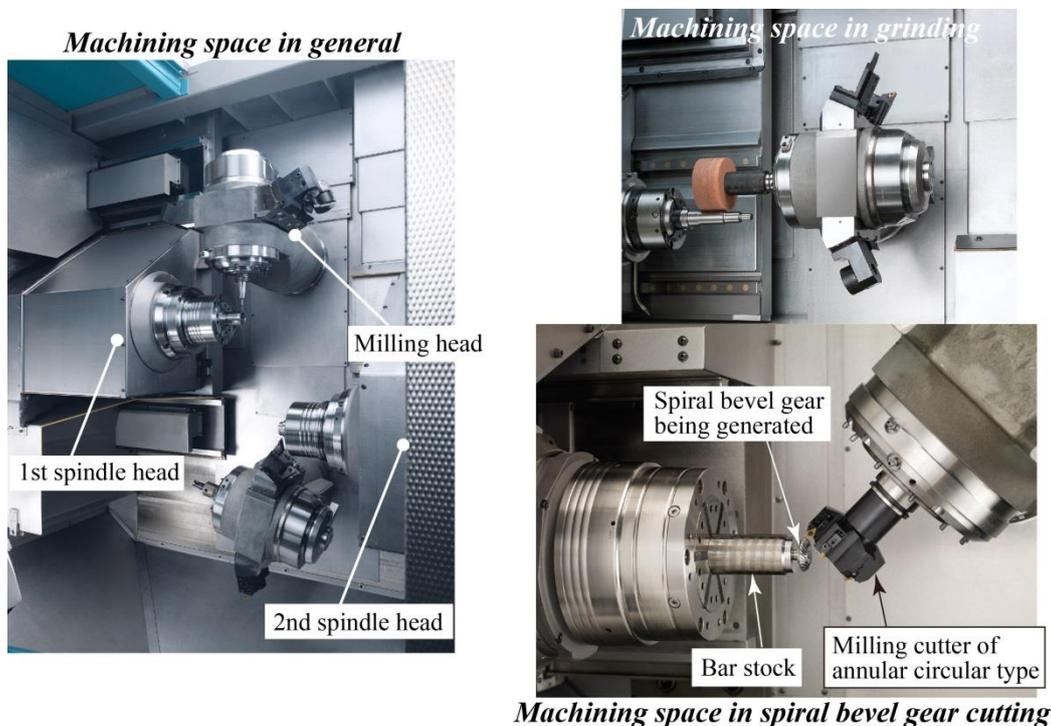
Machining spaces in mill-turn – Direction quickly to “One-machine Shop” (by courtesy of Index, 2016)
